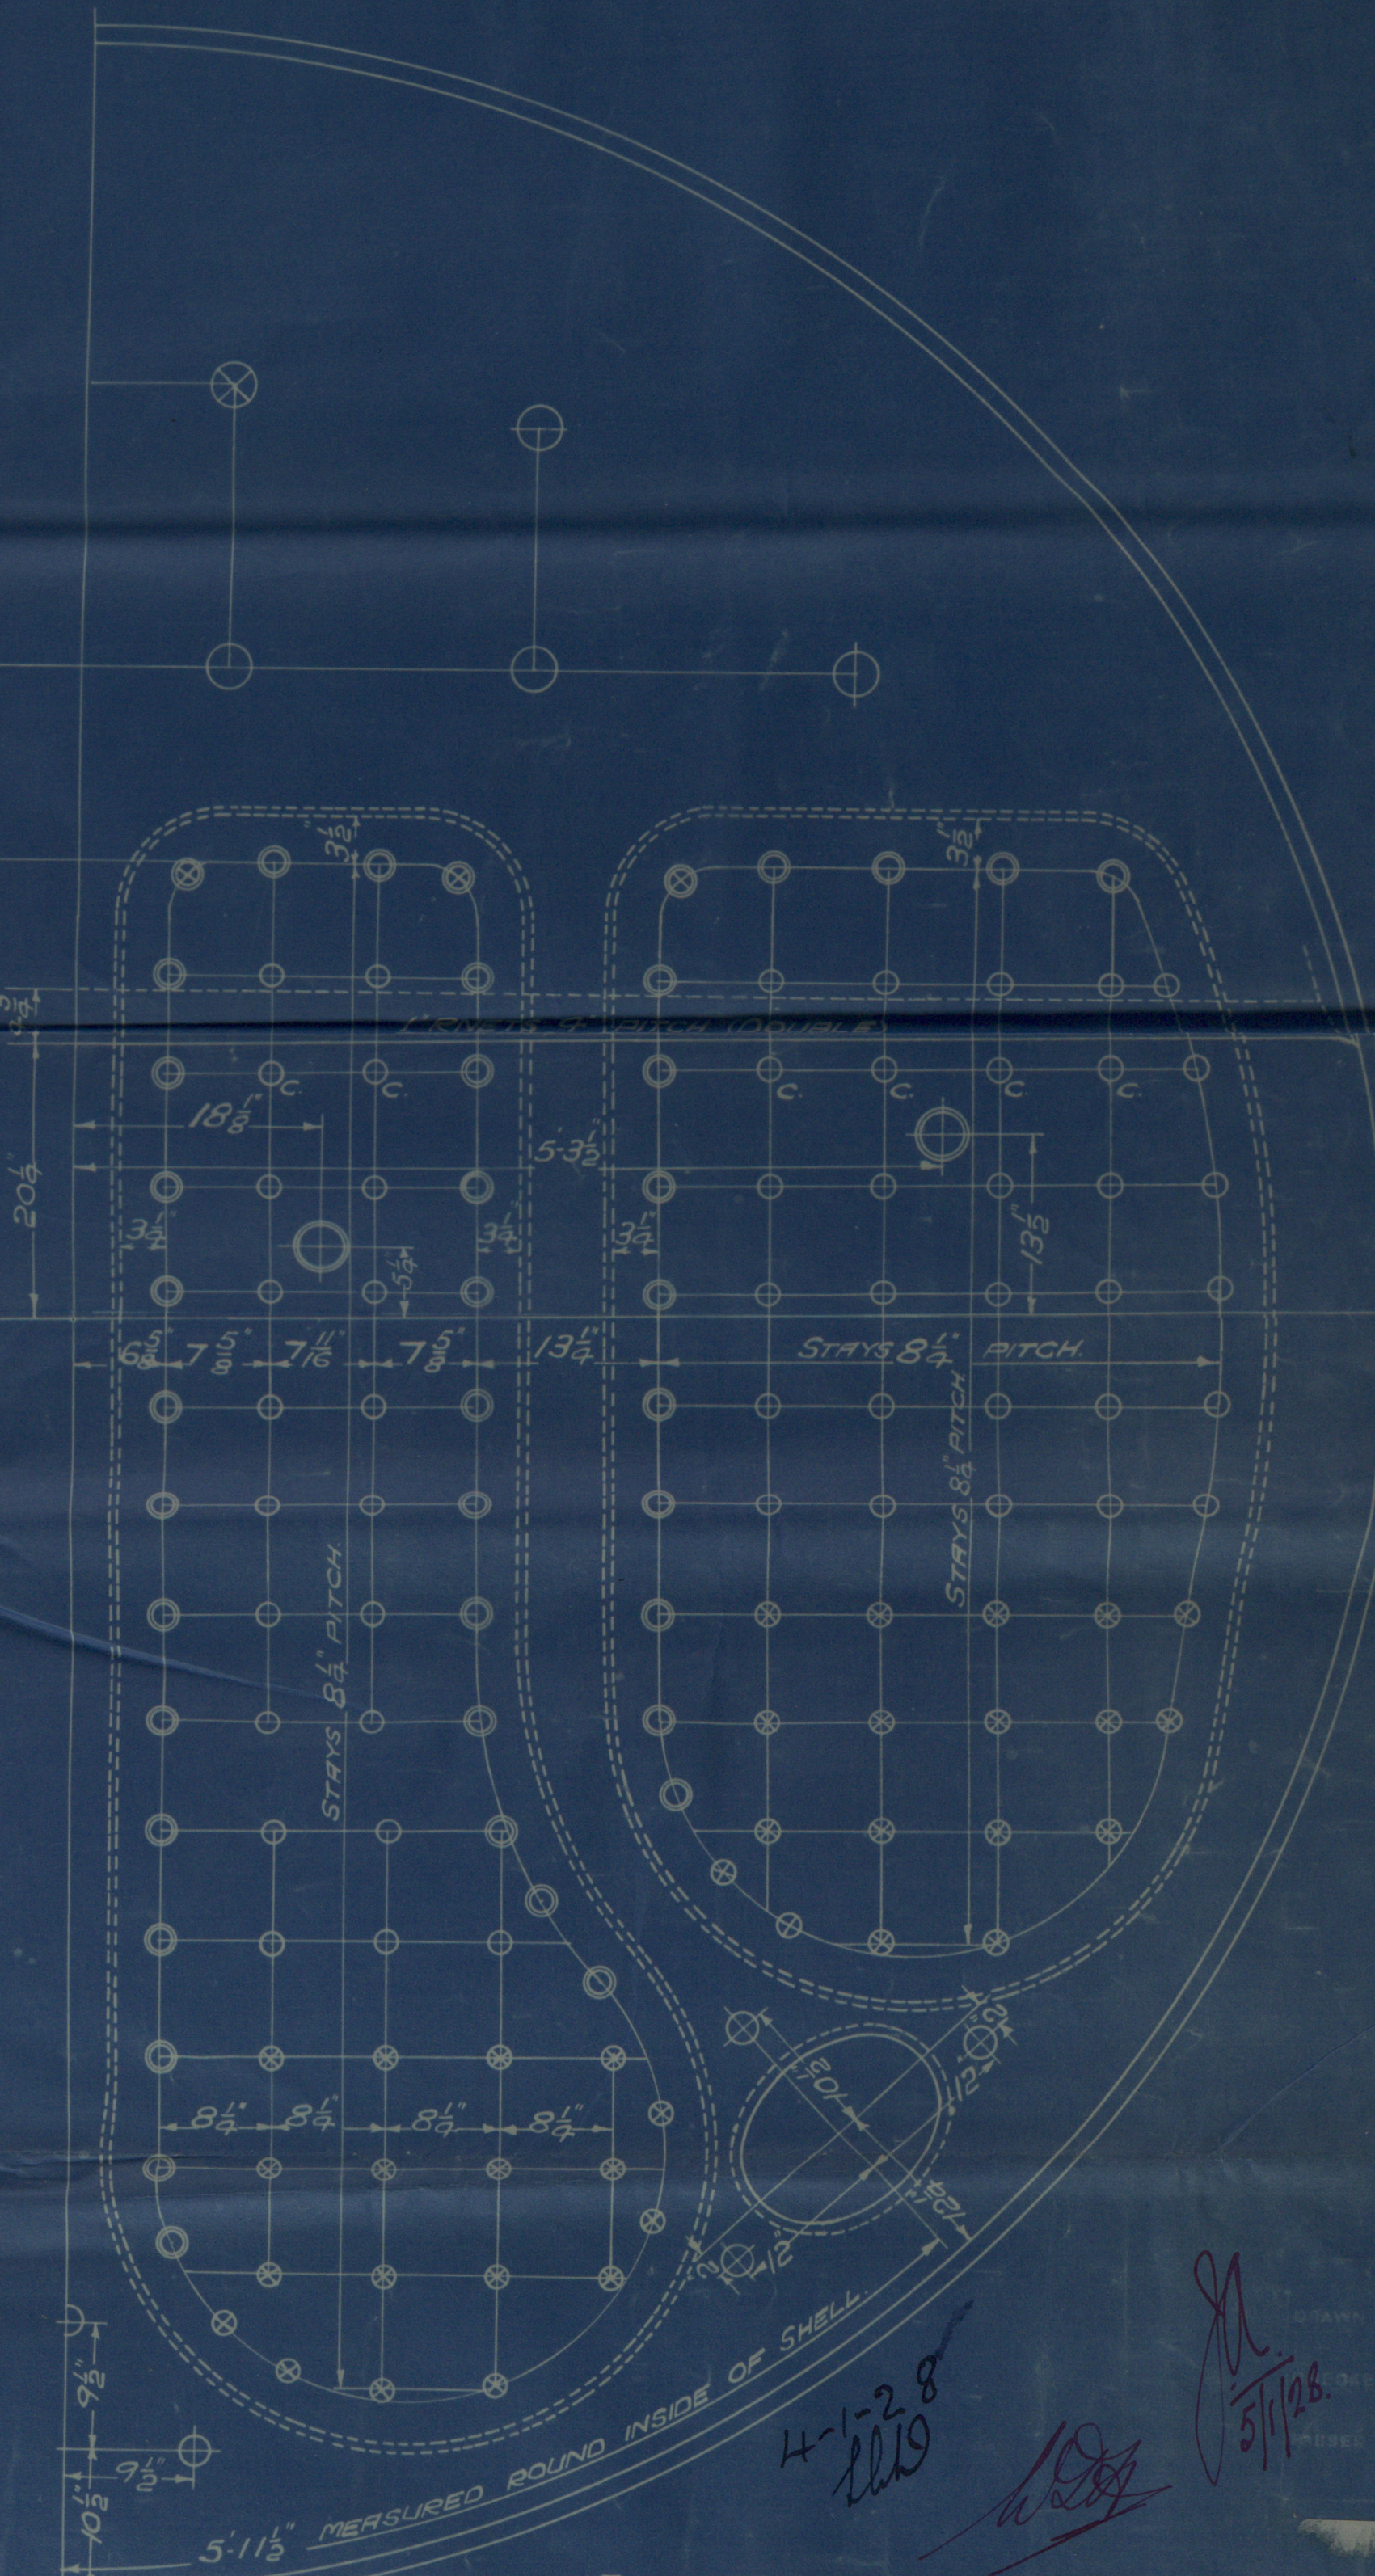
/8" THICK RIVET HOLES 1 1/8" DIA
